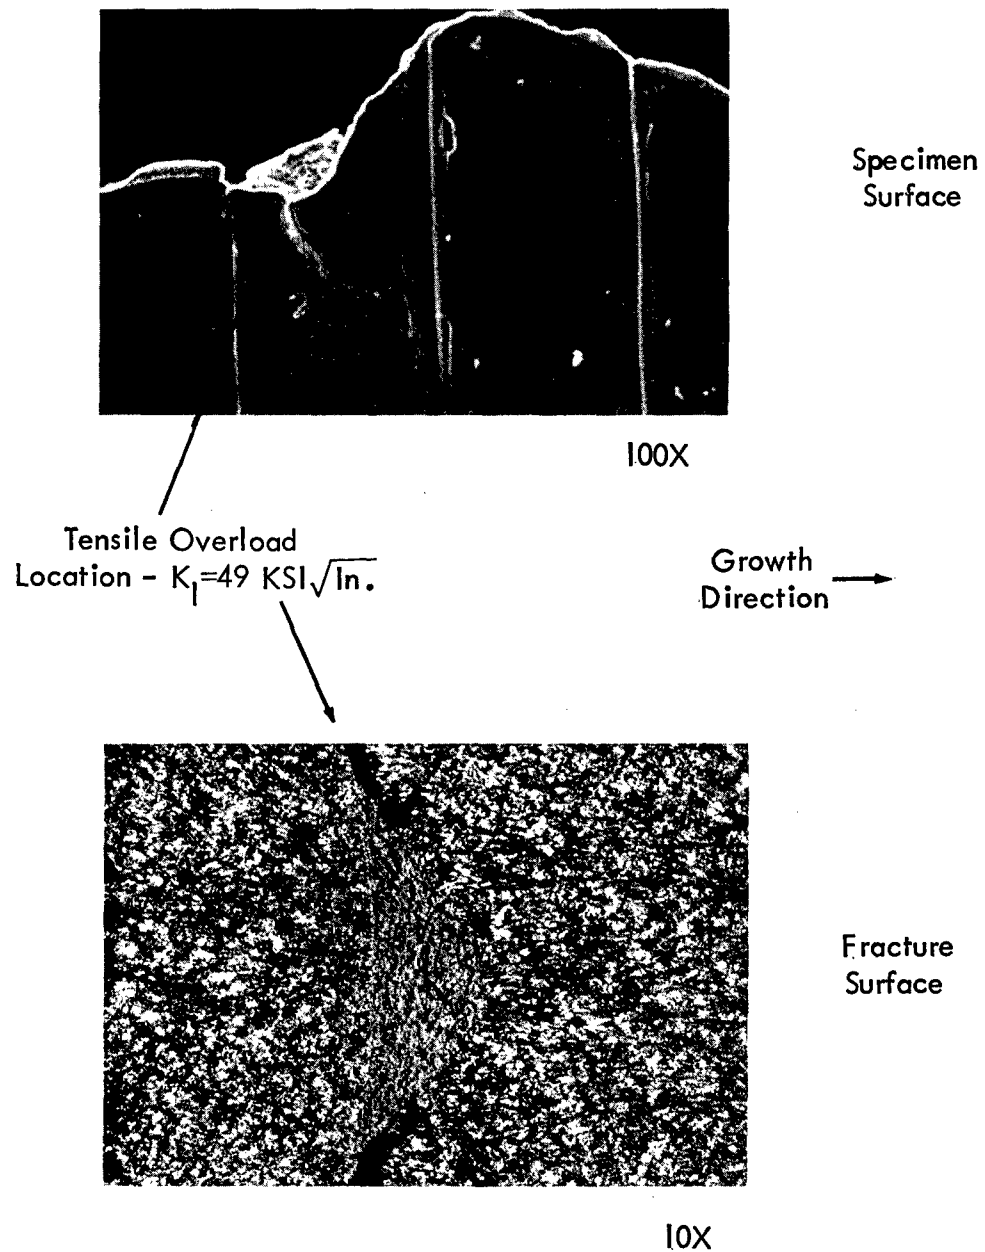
Fracture Surface and Specimen Surface Showing Features Produced by a Tensile Overload of $49 \text{ KSI}\sqrt{\text{In.}}$
